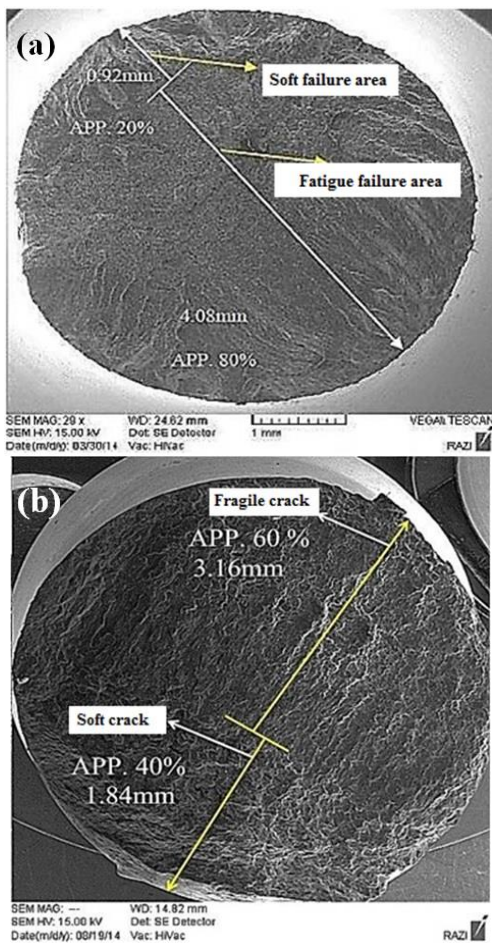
SEM fractography of samples. (a) Air-fatigued surface, (b) corrosion fatigued surface in a seawater environment.
